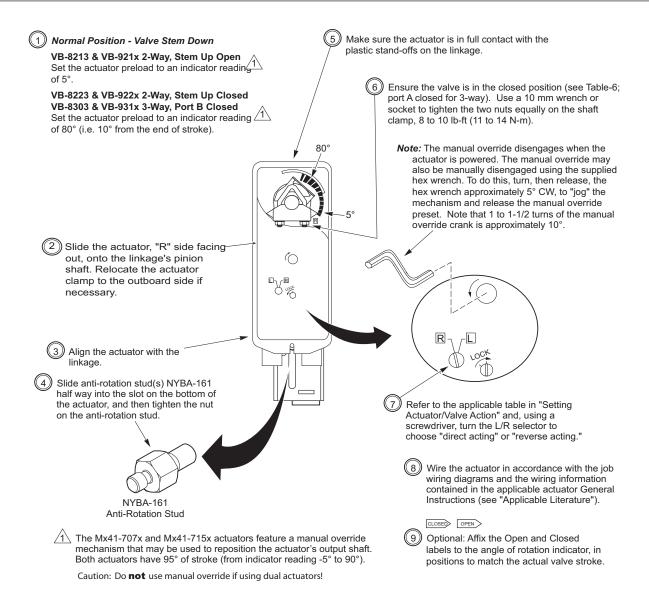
Mounting Mx41-707x or M41-715x and Setting Up Actuator/Linkage/Valve
